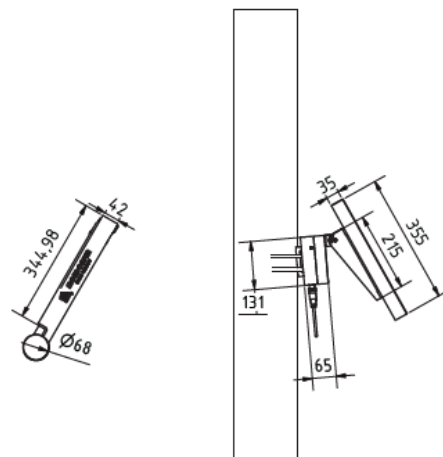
SIDE VIEW (DIMENSIONS MM (NTS))
